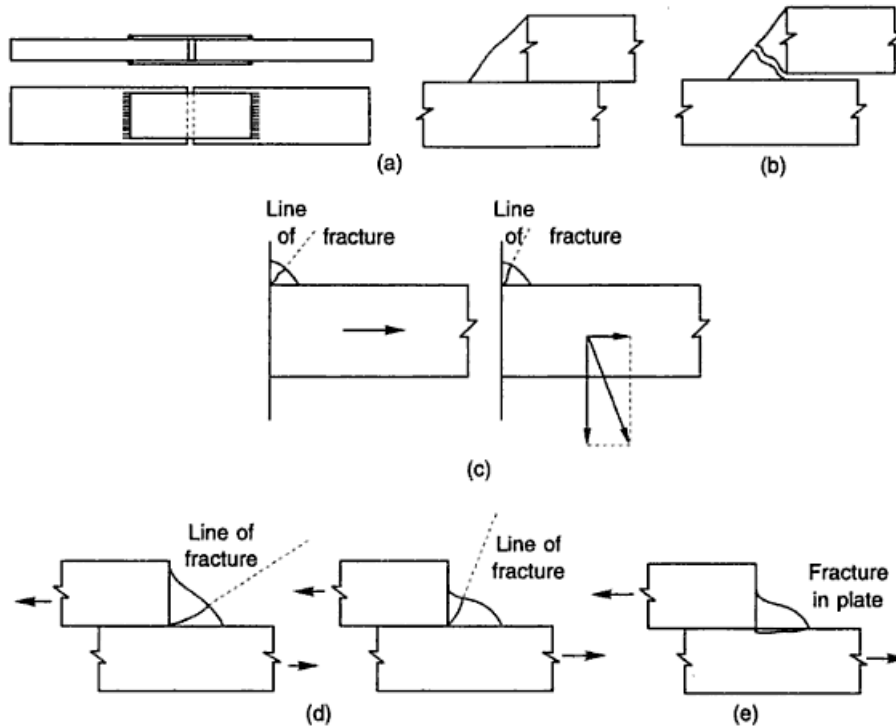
Position of Fracture in End Fillet Welds
